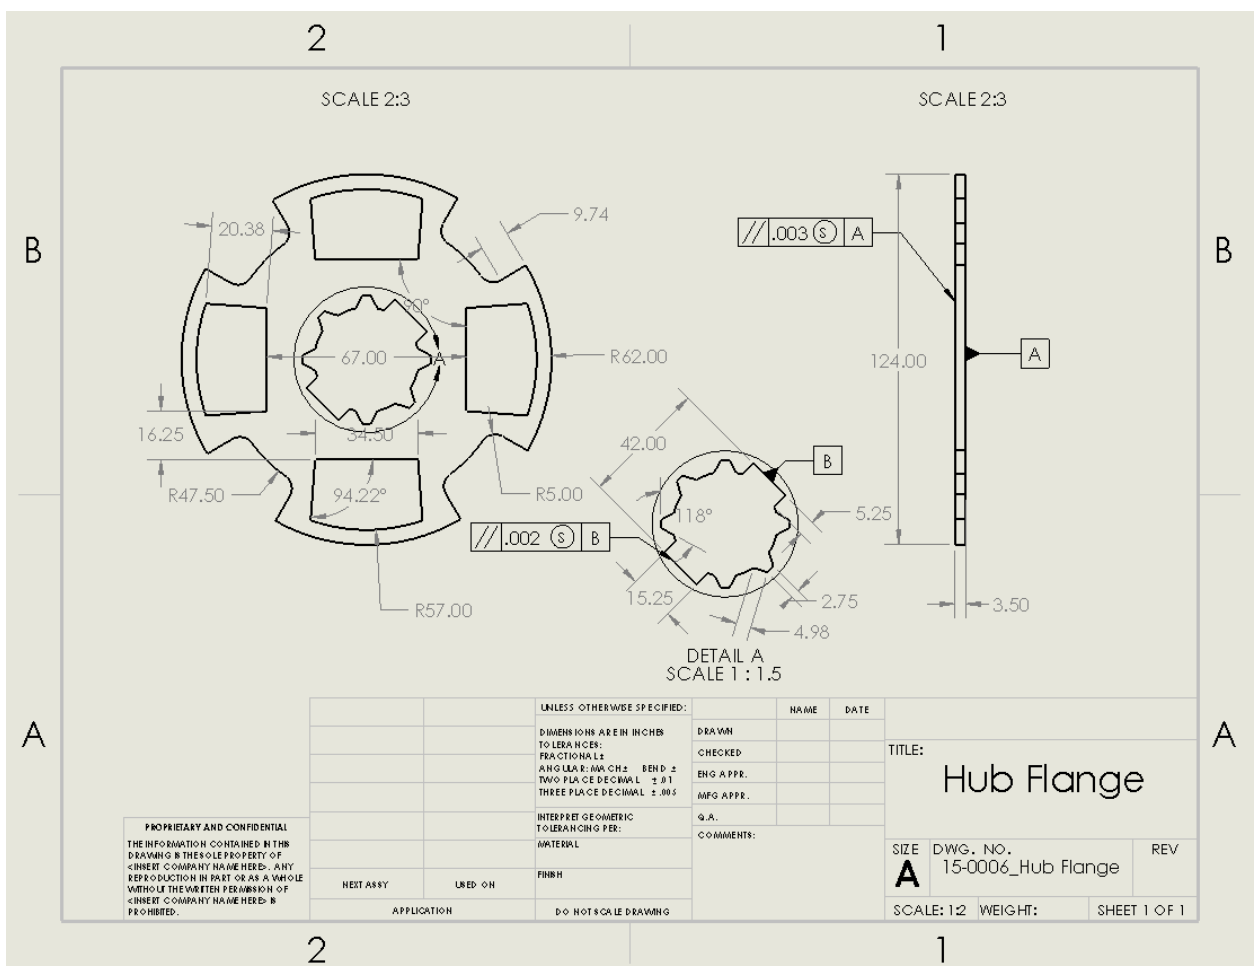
These are the main geometric and dimensional tolerances for the hub flange. This is the 6th part to make following the video [1:13:00 – 1:18:00]: <https://youtu.be/azITzOcZ6-g>
